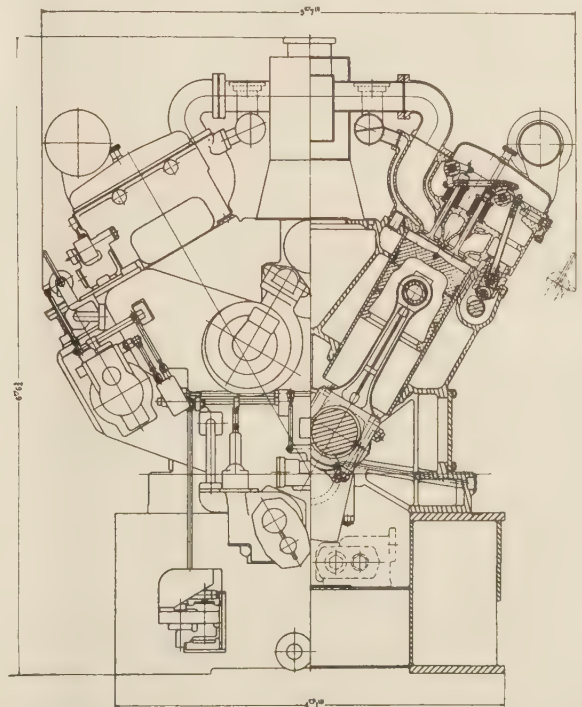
LOCOMOTIVE-TYPE  $9 \times 12$ -IN. V-ENGINE WITH HORIZONTAL STIFFENING WEBS IN THE CAST-STEEL CRANKCASE, AND A WELDED BASE
